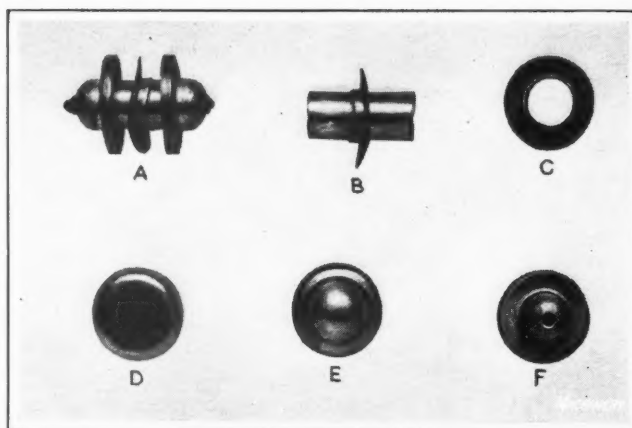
Sheet-metal Products of Forming and Assembling Dies
